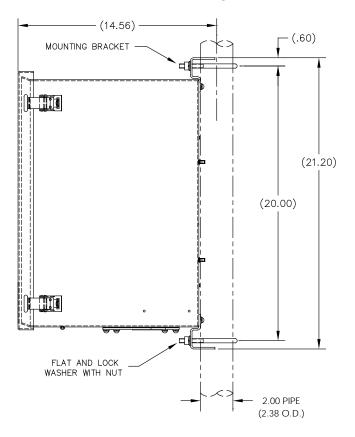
6700 Enclosure Pipe Mounting Installation
